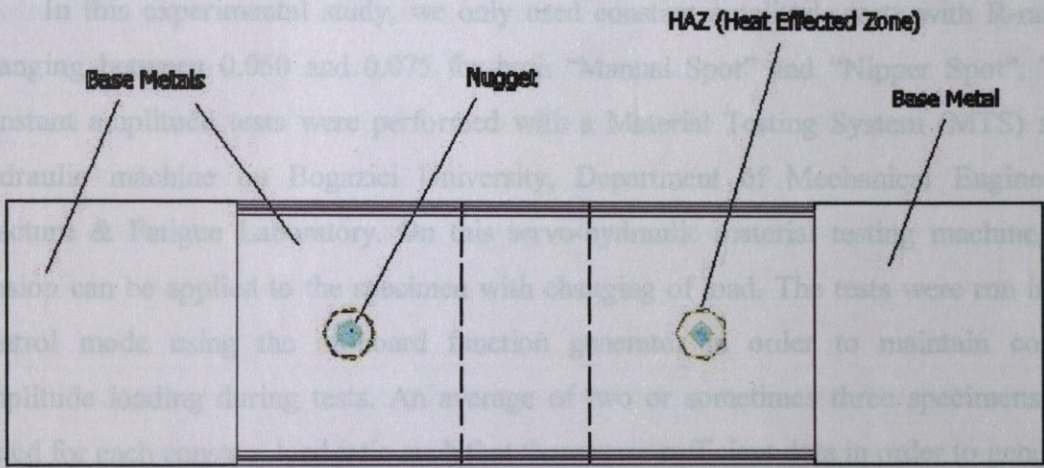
Technical drawing of MTS (modified tensile shear specimen)
